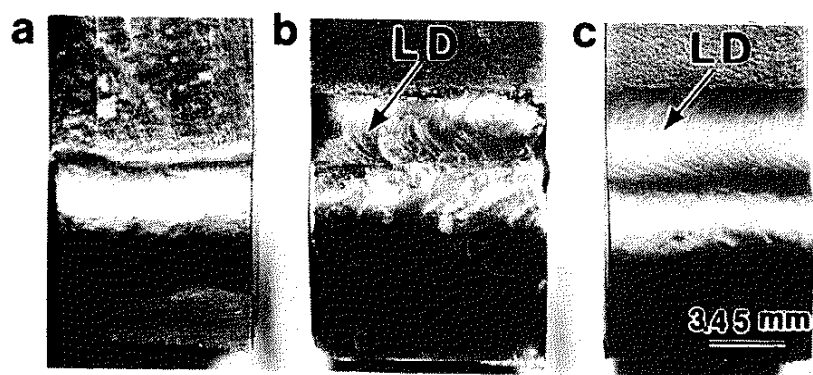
Various toe configurations of welded 18 Ni (250) maraging steel: a: AW, b) LD, c) LDA.
